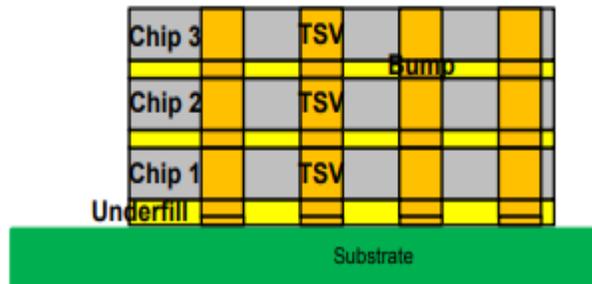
DIE STACKED 3D TSV PACKAGE
